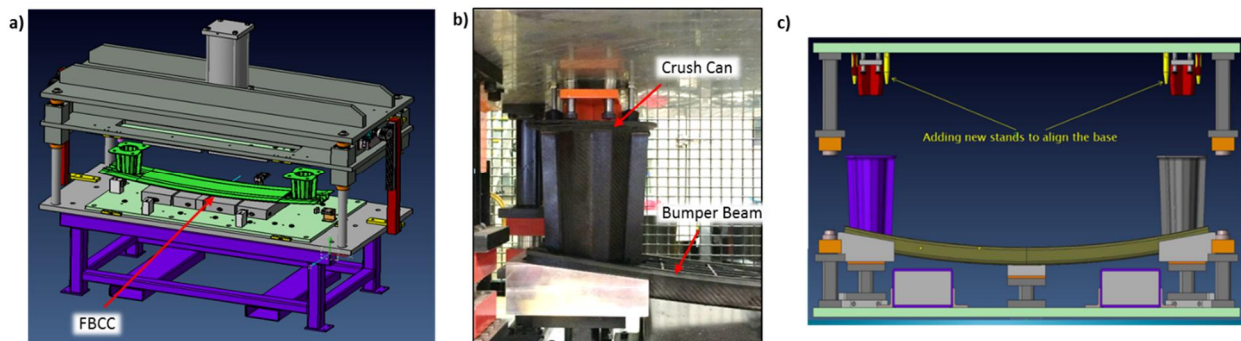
The fixture used to join the assembled crush can and bumper beam. a) Schematic of the press and fixture showing the location of the FBCC. b) A zoomed-in photograph of the actual FBCC components in the press. c) Pins were added to the fixture to ensure the holes for mounting the FBCC to the crush test sled were properly aligned.
